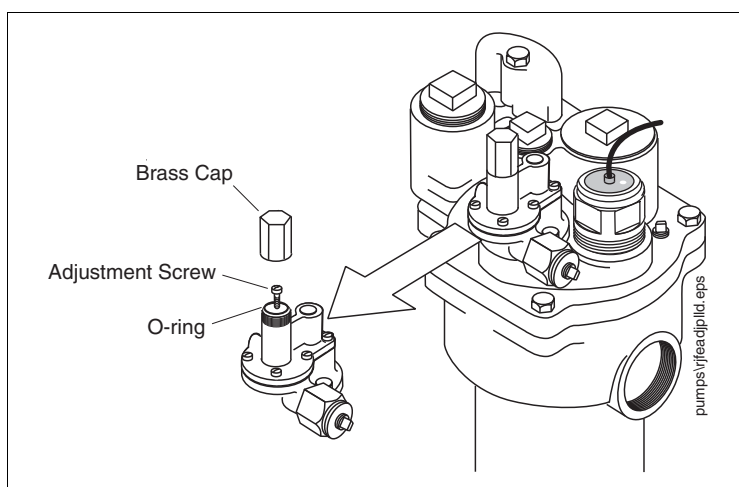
Pressurstat adjustable valve assembly (Red Jacket Standard pump shown)
